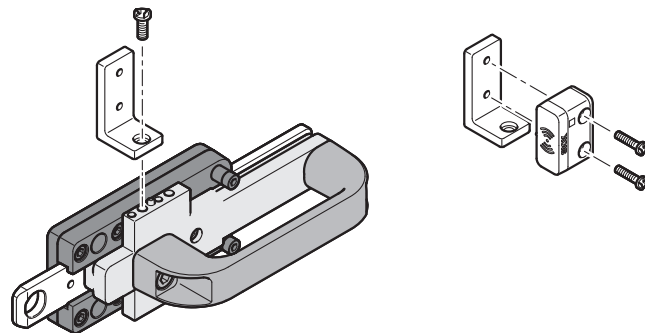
MB1-BL – Mounting the actuator for the safety switch
